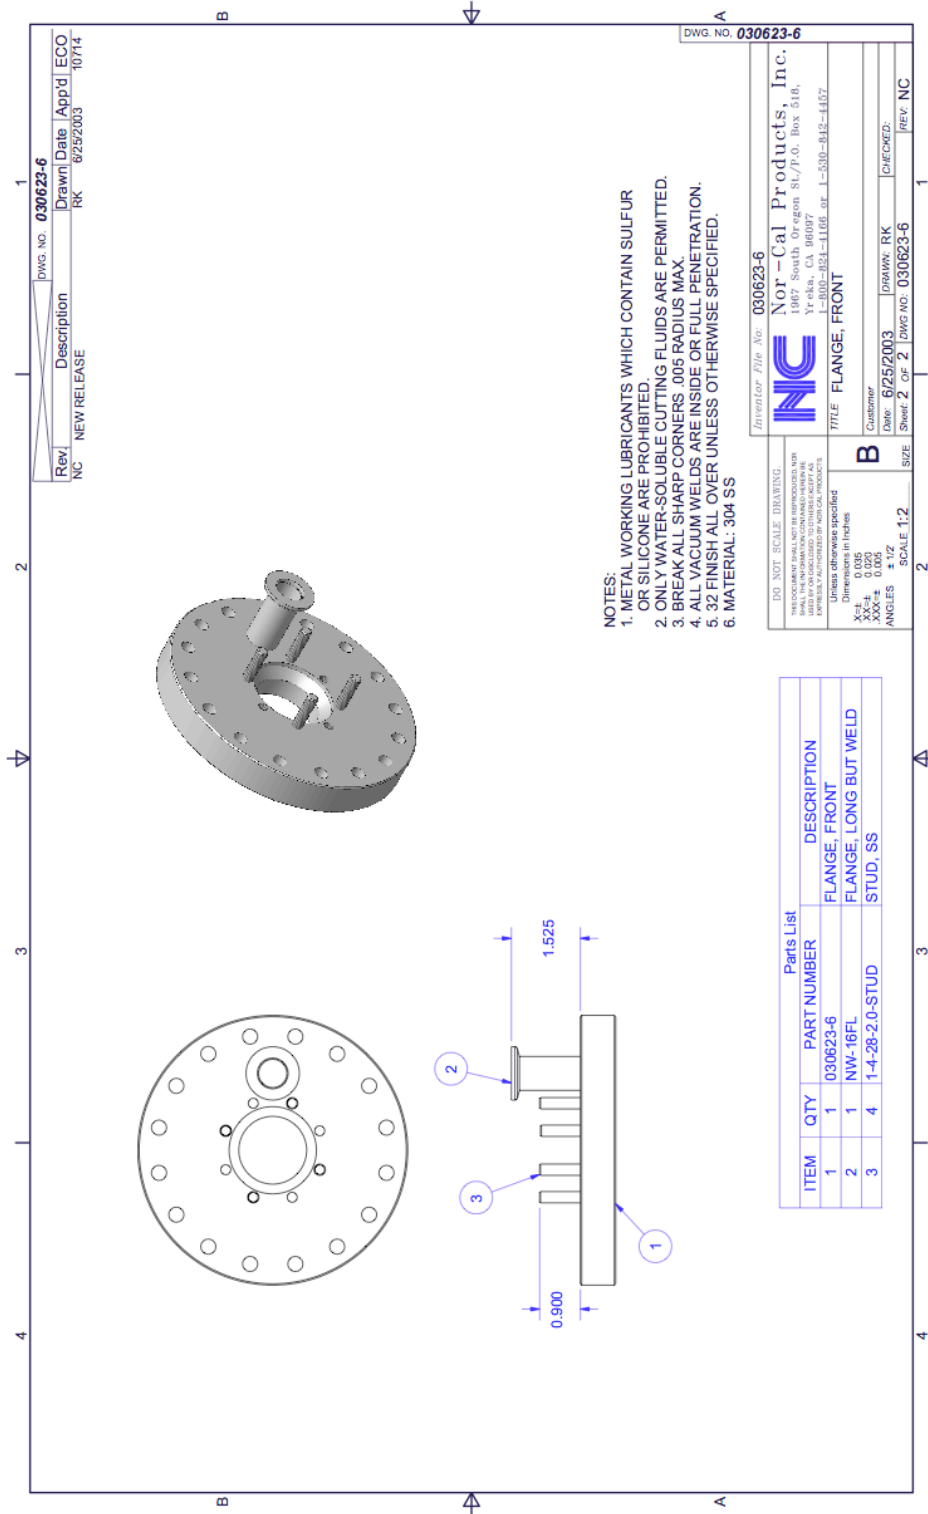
Front flange CAD diagram – front (exterior) view.
